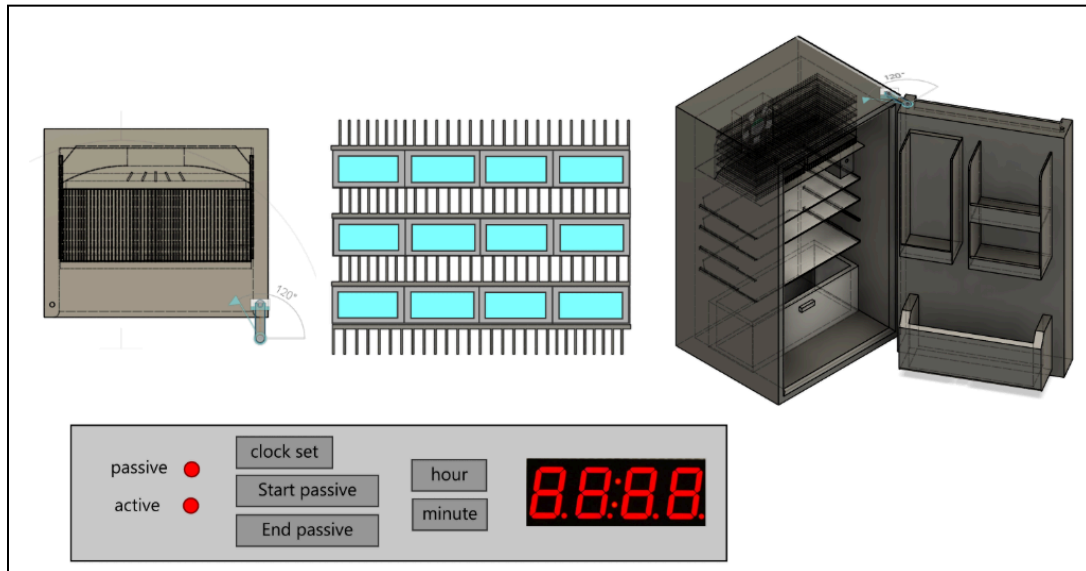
Smart Refrigerator final design including freezer compartment layout, fin and ice block assembly, retrofitted mini refrigerator, and control panel layout
